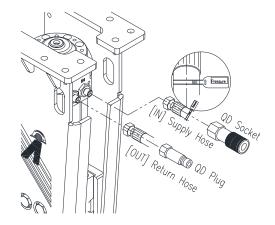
Port [IN] and [OUT] Marked On Valve Housing
